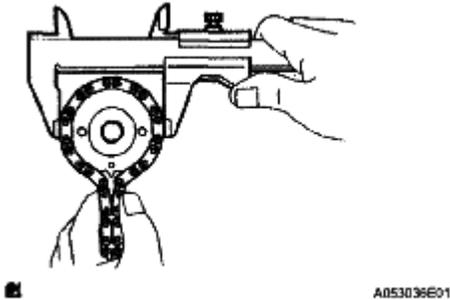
Inspecting Oil Pump Drive Shaft Gear
